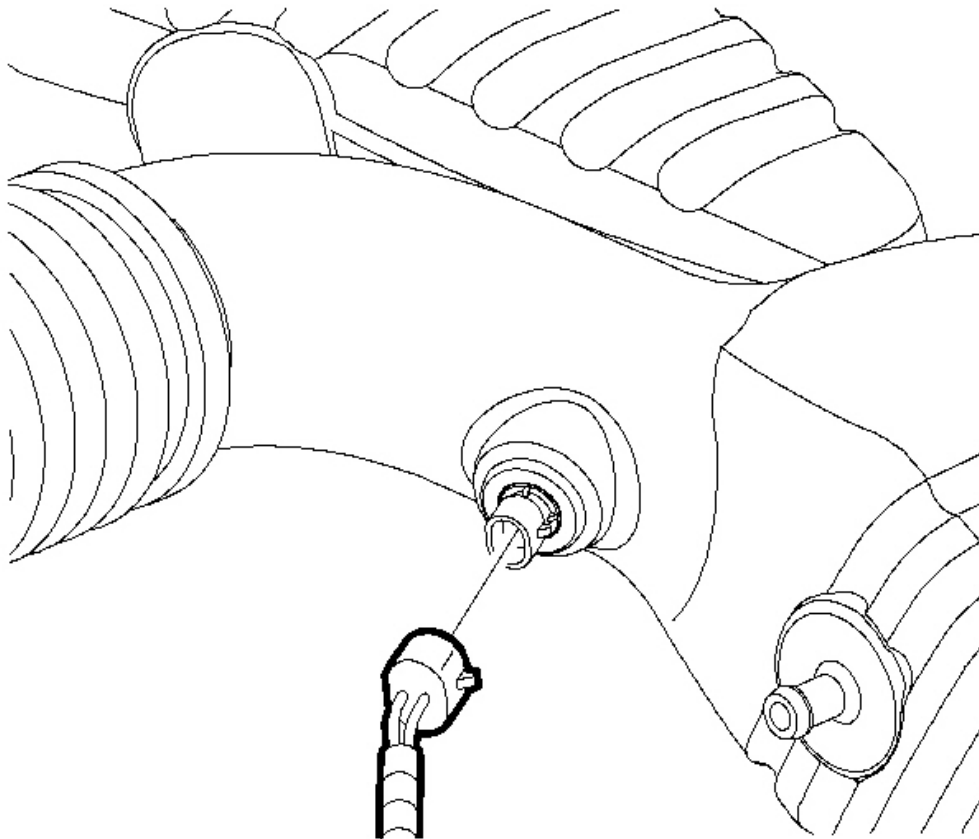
Connecting Intake Air Temperature (IAT) Sensor Connector
